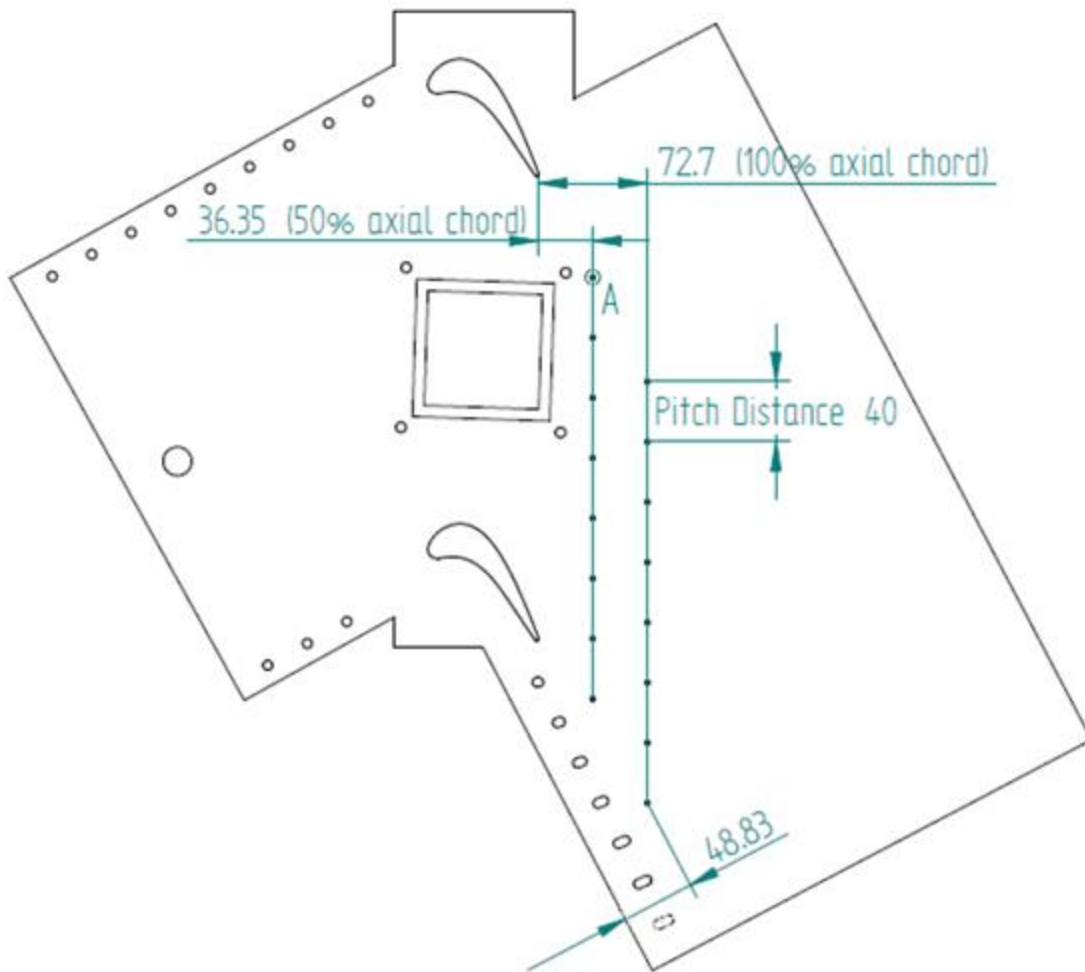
End wall static pressure tap arrangement. Dimensions are in mm.
